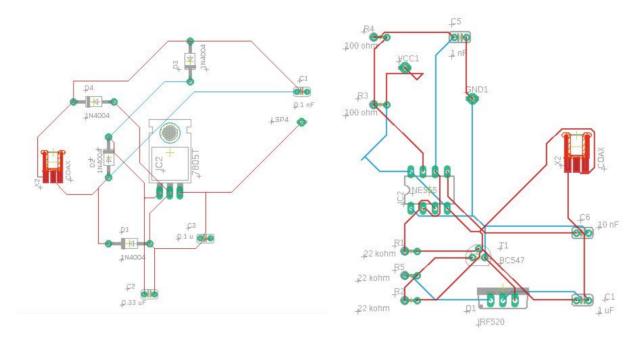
Receiver PCB Layout (left) and Transmitter PCB Layout (right)
